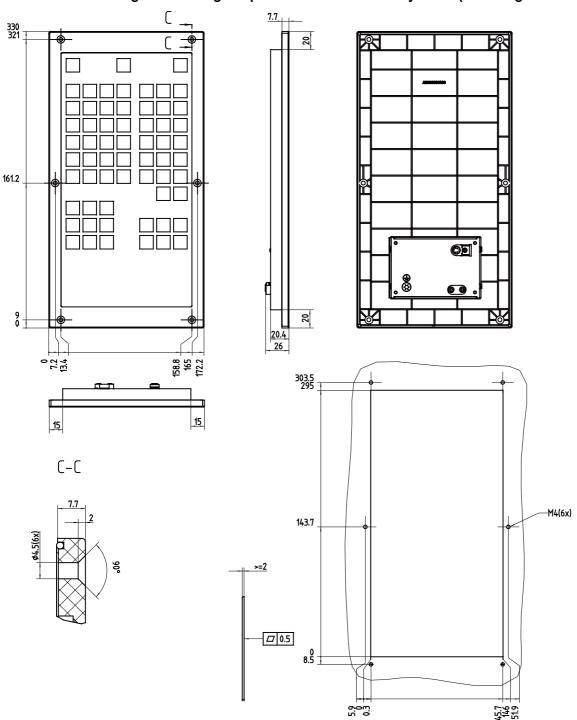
Dimensional drawings and drilling templates of the CNC full keyboard (mounting next to the PCU)
